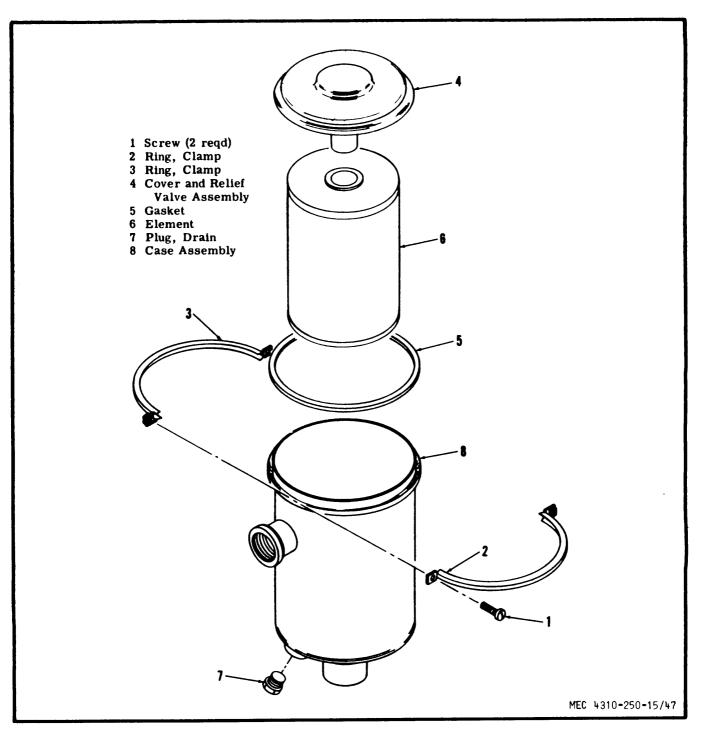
Compressor Oil Filter, Disassembly and Reassembly.
